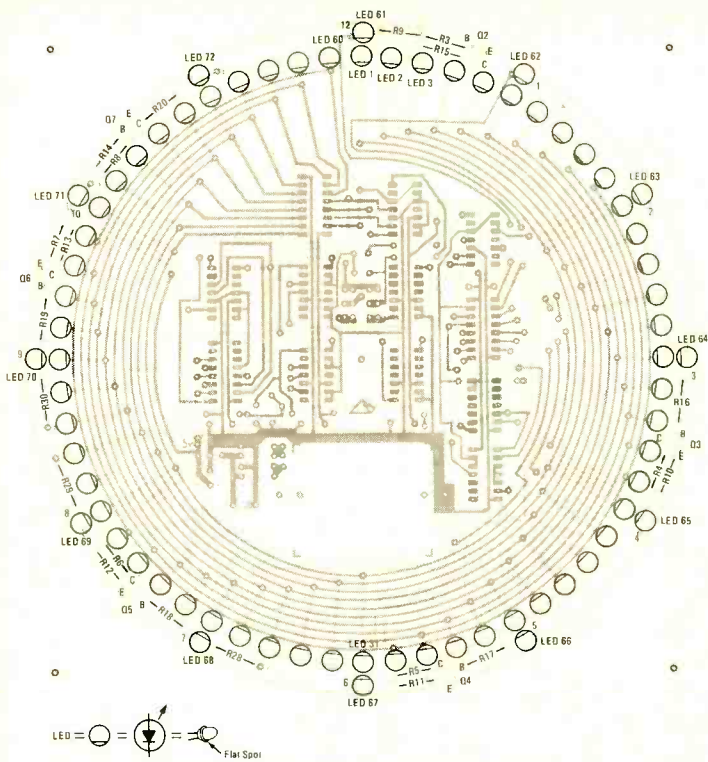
COMPONENT PLACEMENT for front of PC board.
